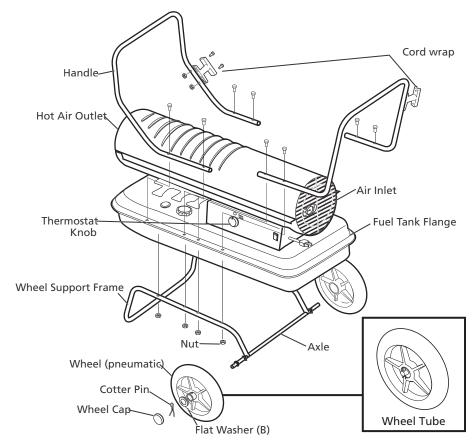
Models 3VE50A, 3VE51A and 3VE52A Assembly
